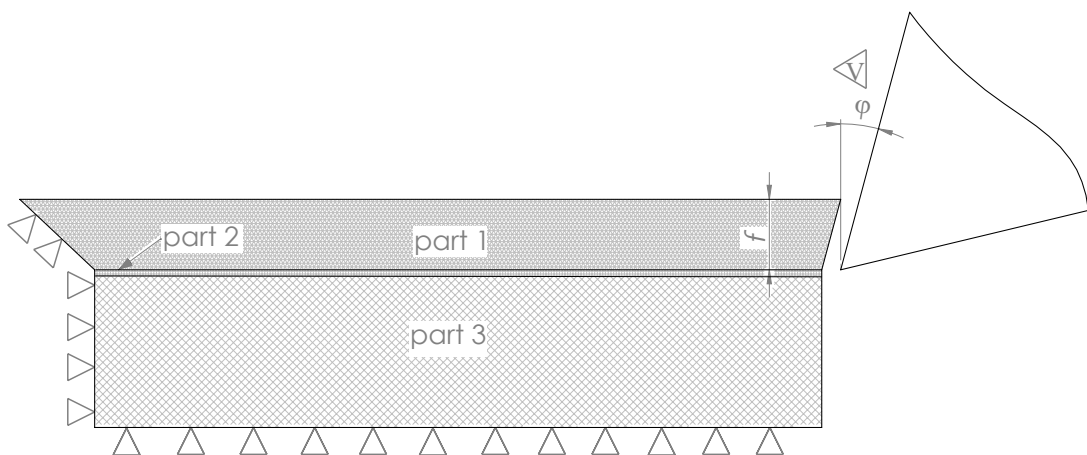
Machining simulation boundary conditions, dimensions, and parts
